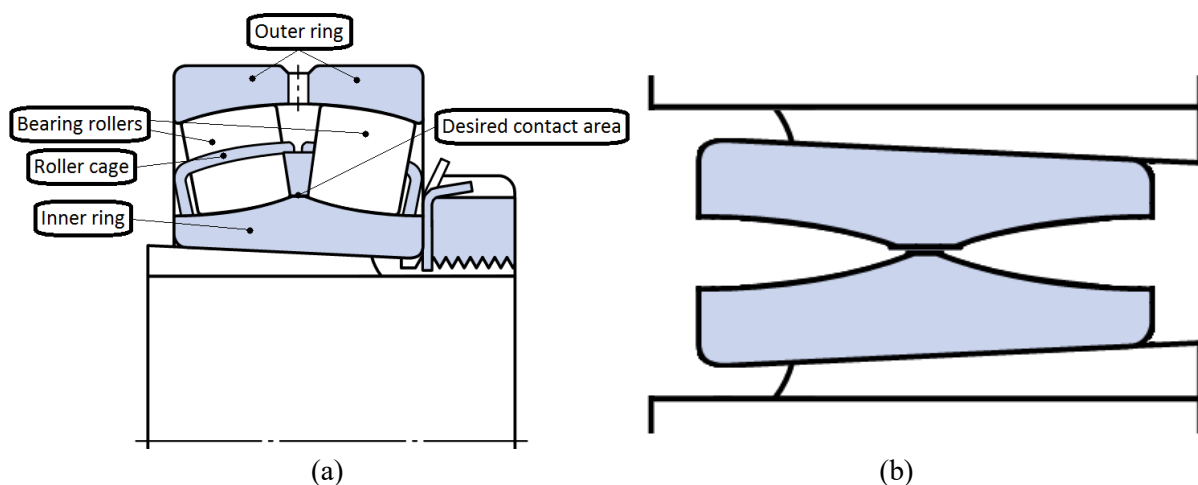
Schematic illustration of bearings applied in the present experiment: (a) cross-section of the bearing; (b) cross-section of the inner rings ground to the desired contact width.
